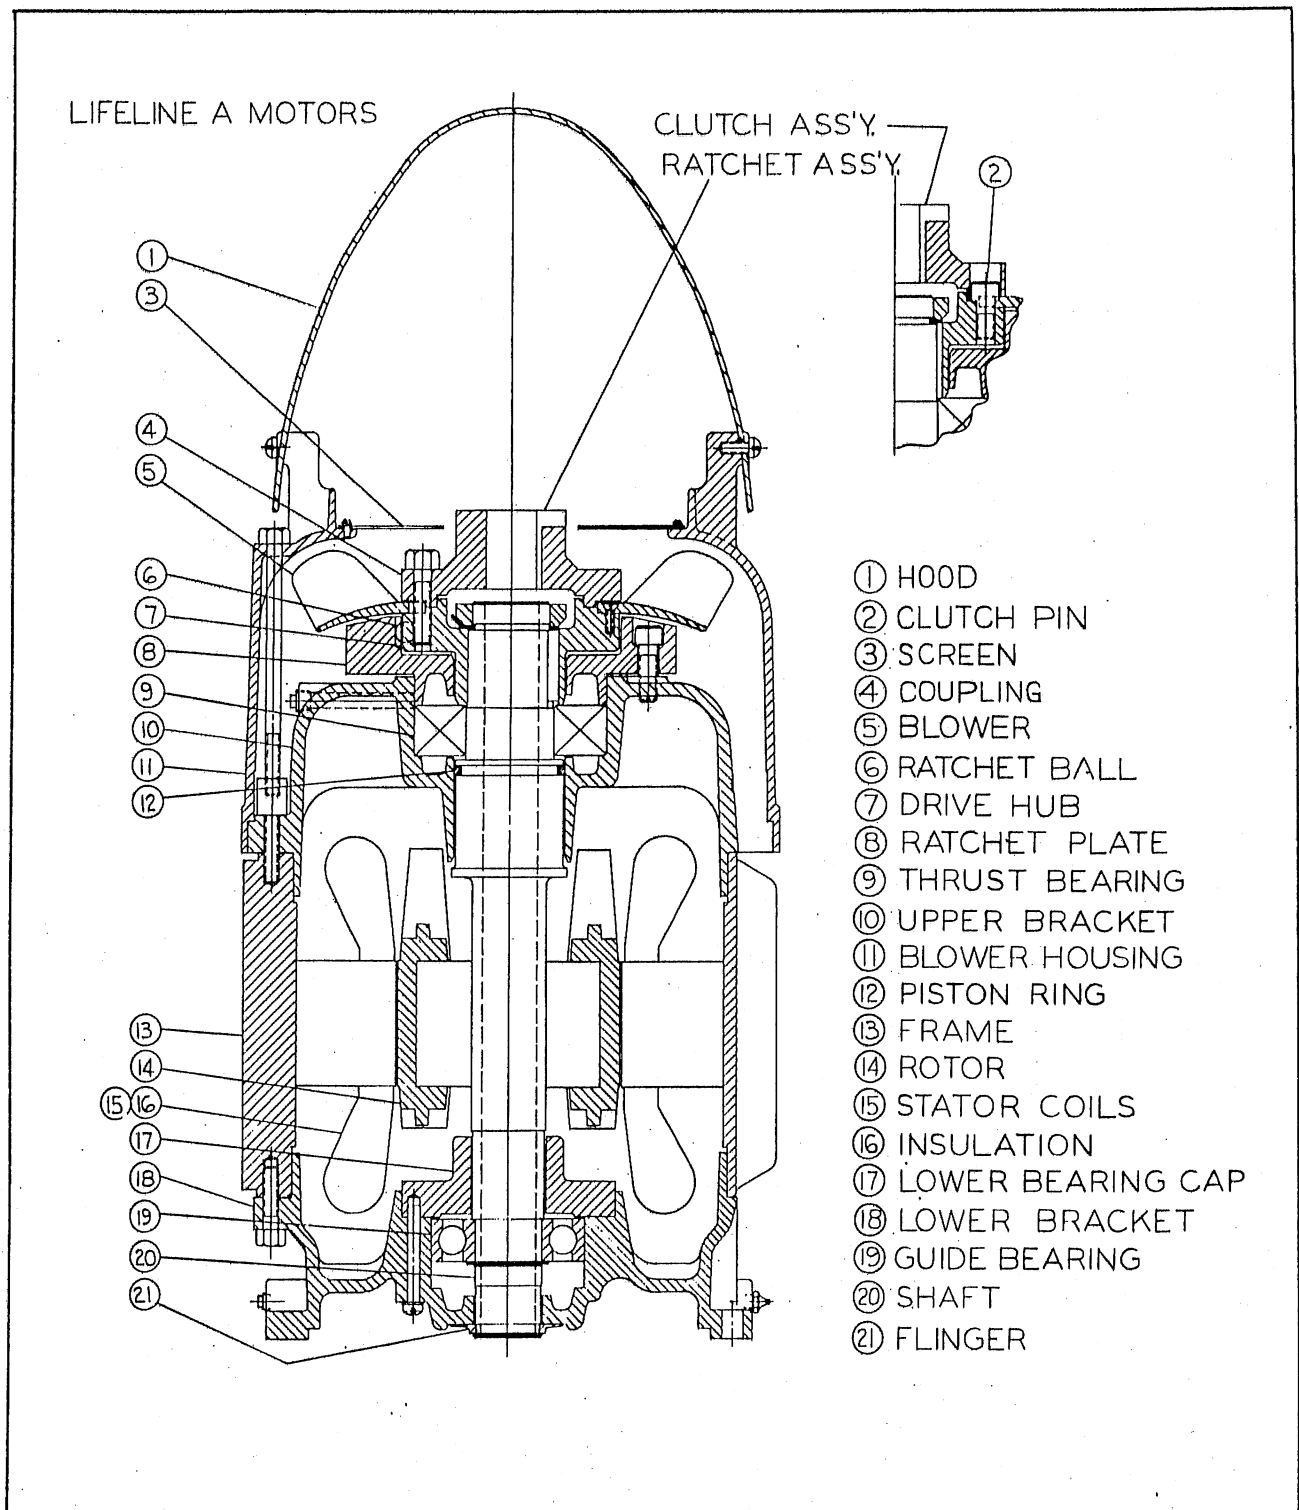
Arrangement of Parts, Vertical Hollow Shaft Fan-Cooled or Type A Life-Line Explosion Proof Motor, Frames 213-326 (Solid Shaft Motors Use Same Construction Except Top Coupling is omitted)
